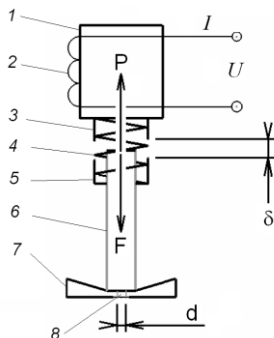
Calculation scheme: 1-electromagnet; 2-winding; 3-armature; 4-spring; 5-guide; 6-needle; 7-housing; 8-injection hole; d-diameter of the injection hole; δ - stroke of the needle
